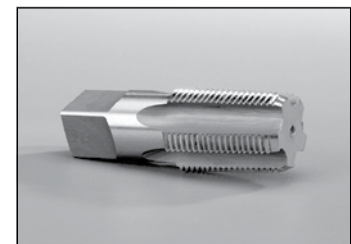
BSPT Taper Pipe Thread Tapping Tool
